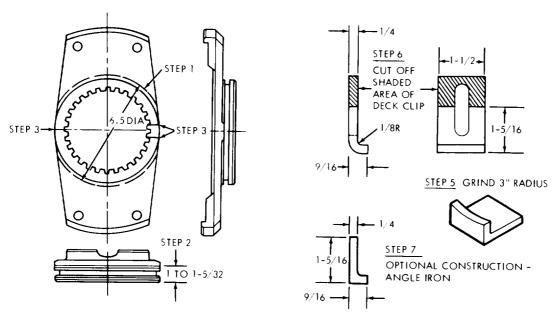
Final drive adapter hook-up tool (Sheet 1 of 2).
